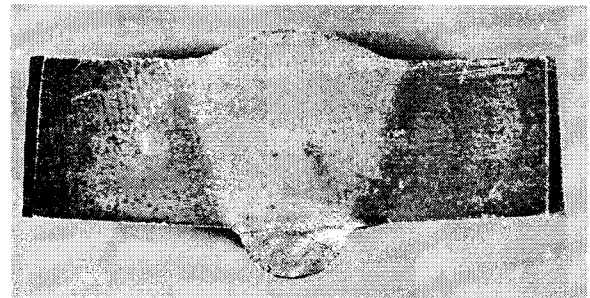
Macro image of 1-pass keyhole welding (Al 2219-T0 11.45mm)
